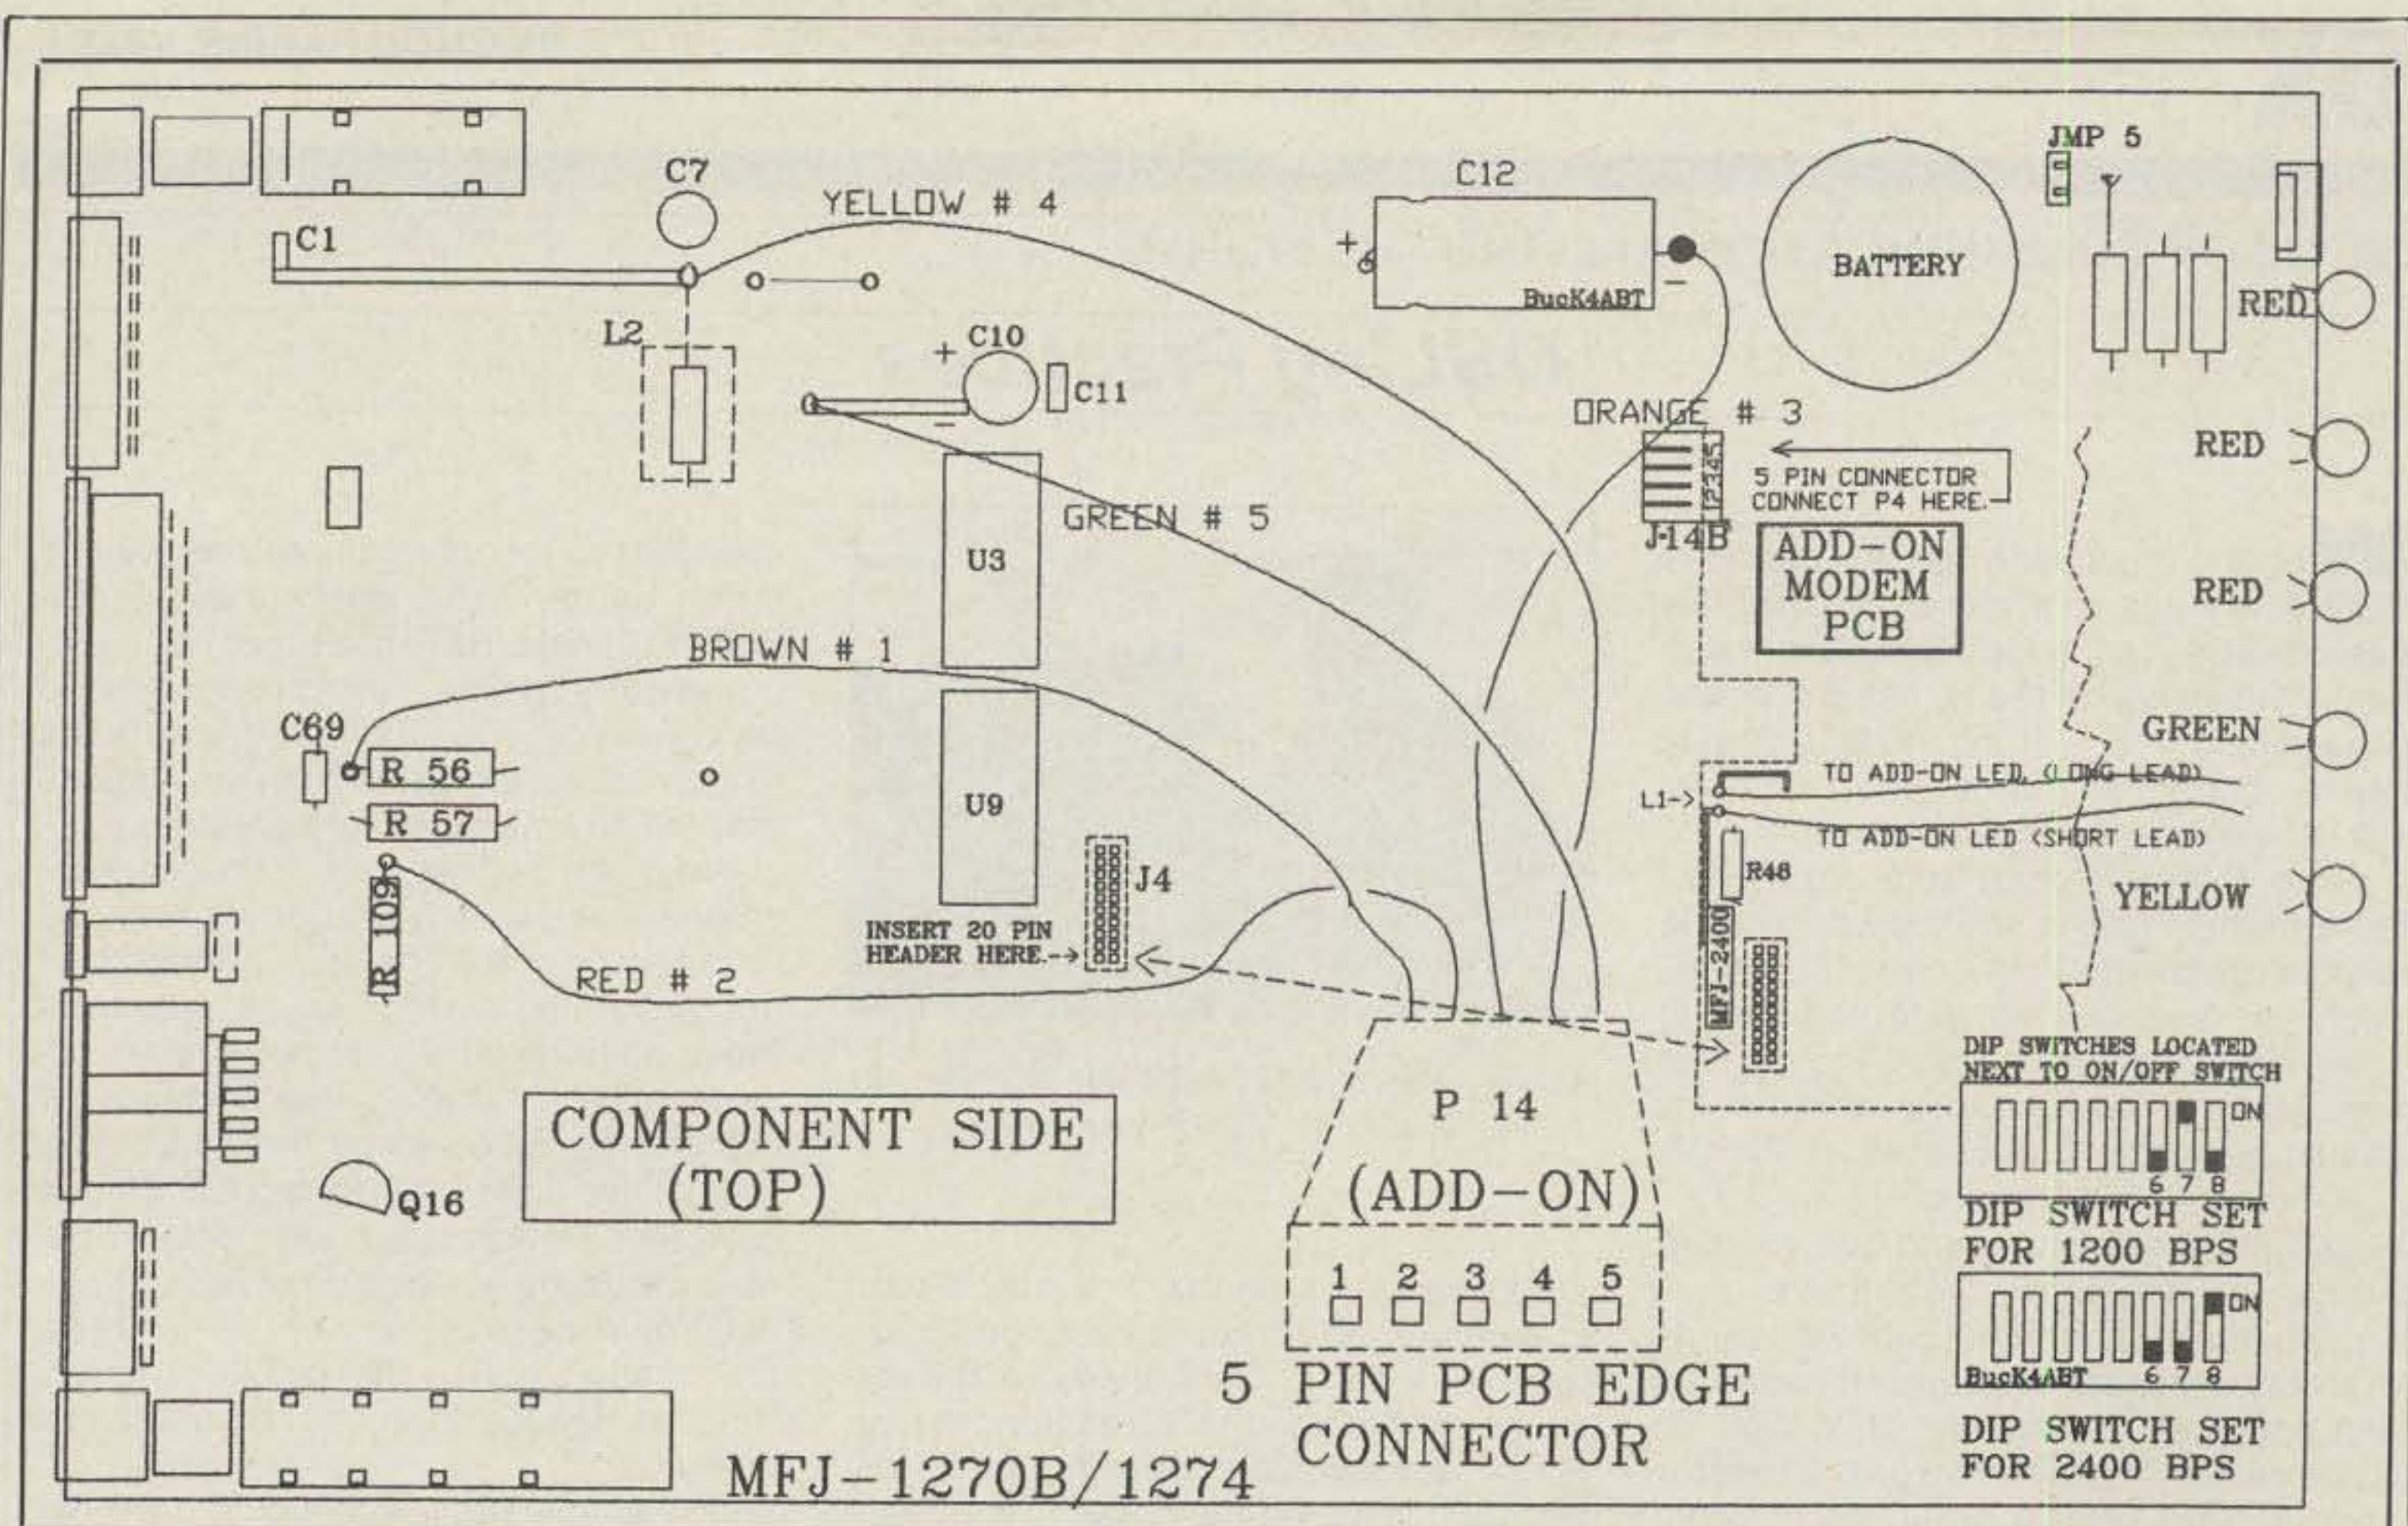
Component side (top) of the MFJ-1274/1270B PC board.
